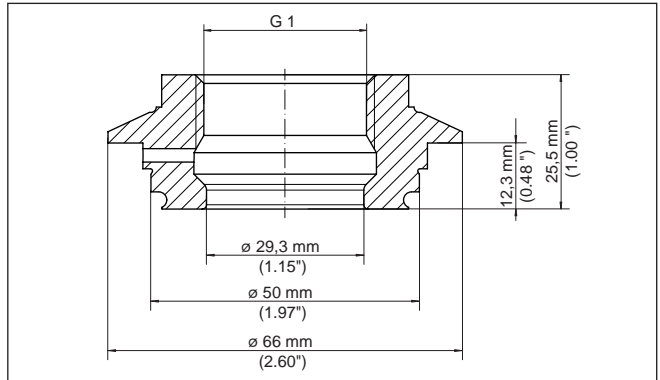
Dimensions hygienic adapter G1 (DIN 3852-X) on Varivent Form F DN 25 - O-ring seal
